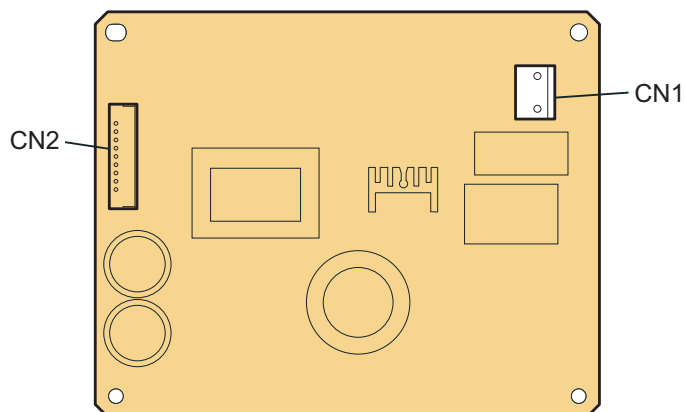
Connector Layout of the BOARD ASSY., POWER SUPPLY
